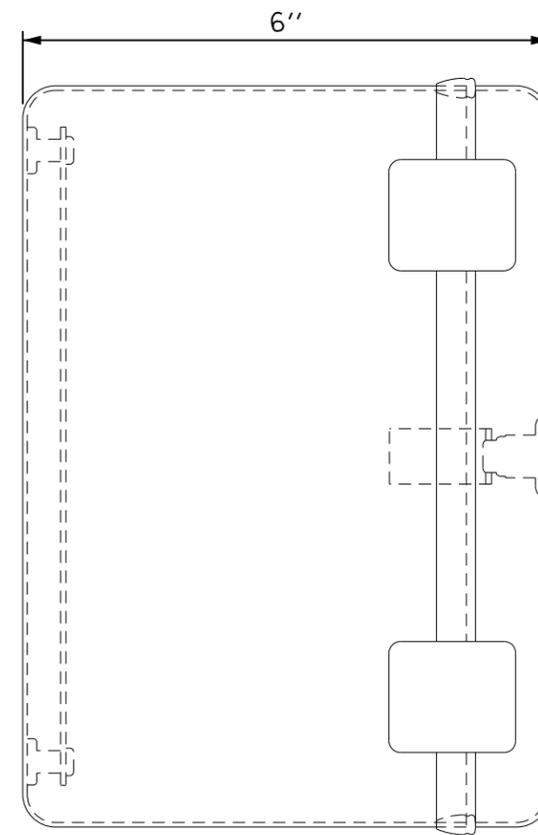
DETAIL A - ANTENNA BULKHEAD INSTALLATION
